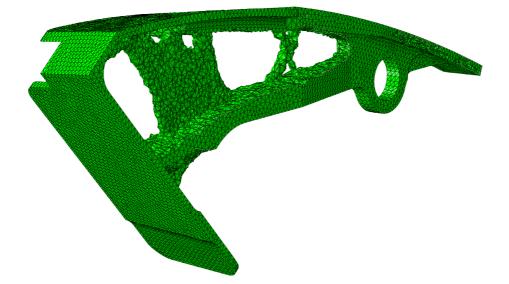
Door Connection Joint; Minimizing volume while maintaining stiffness results
